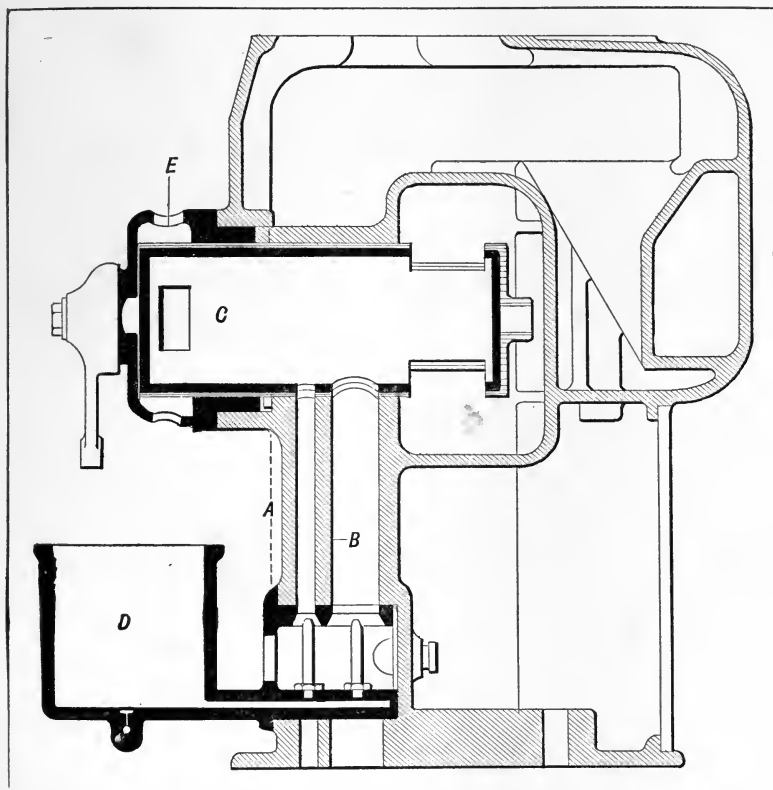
Carburetor Incorporated in F. I. A. T. Cylinder Casting Is a Multiple-Jet Type Having Two Spray Tubes.
